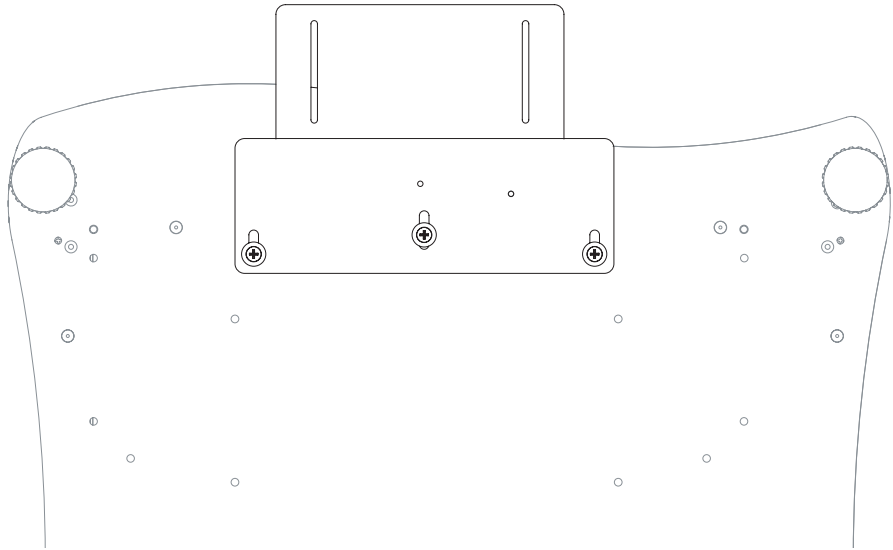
Projector with Whitney (Prismatic) Lens Base Plate - Bottom View
